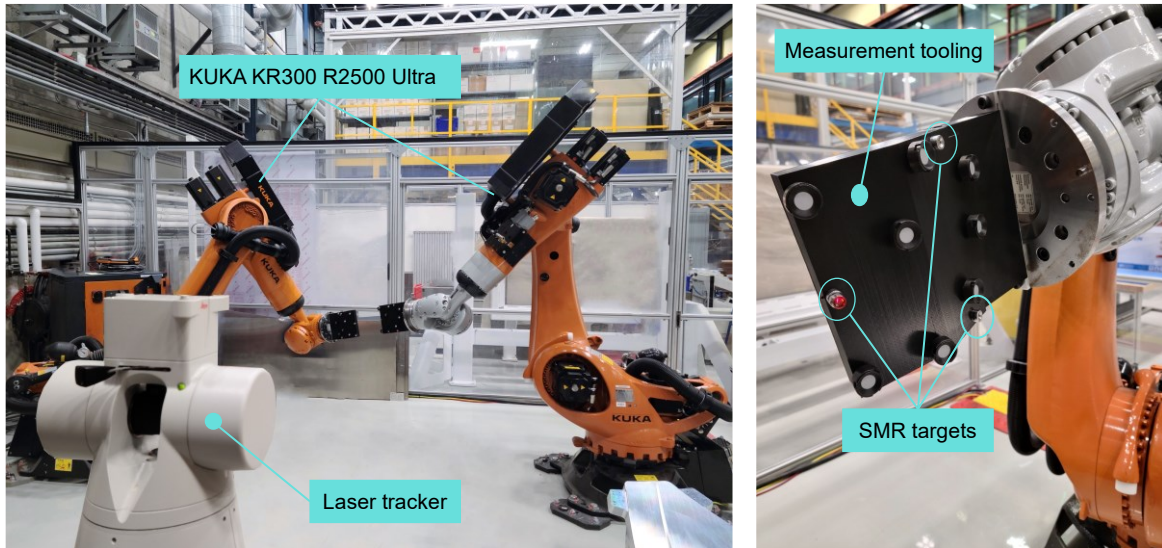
Experimental master-slave setup including two KUKA KR300 R2500 ULTRA robots, Leica LT800 laser tracker, measurement tooling, and SMR targets
